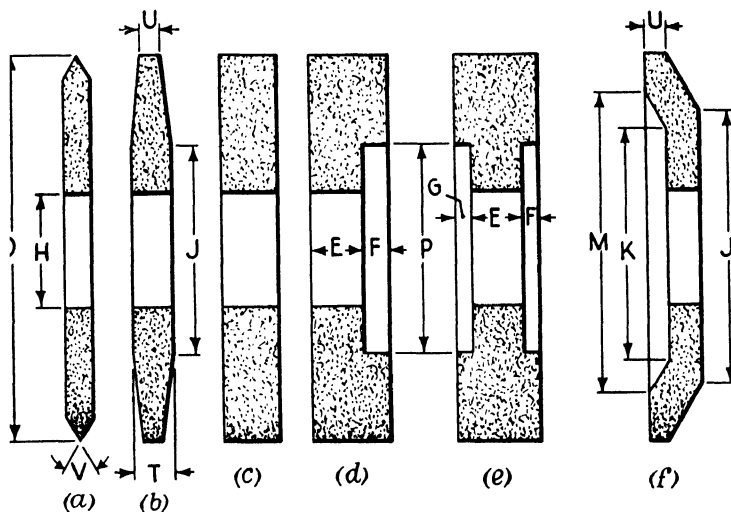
STANDARD GRINDING-WHEEL SHAPES
